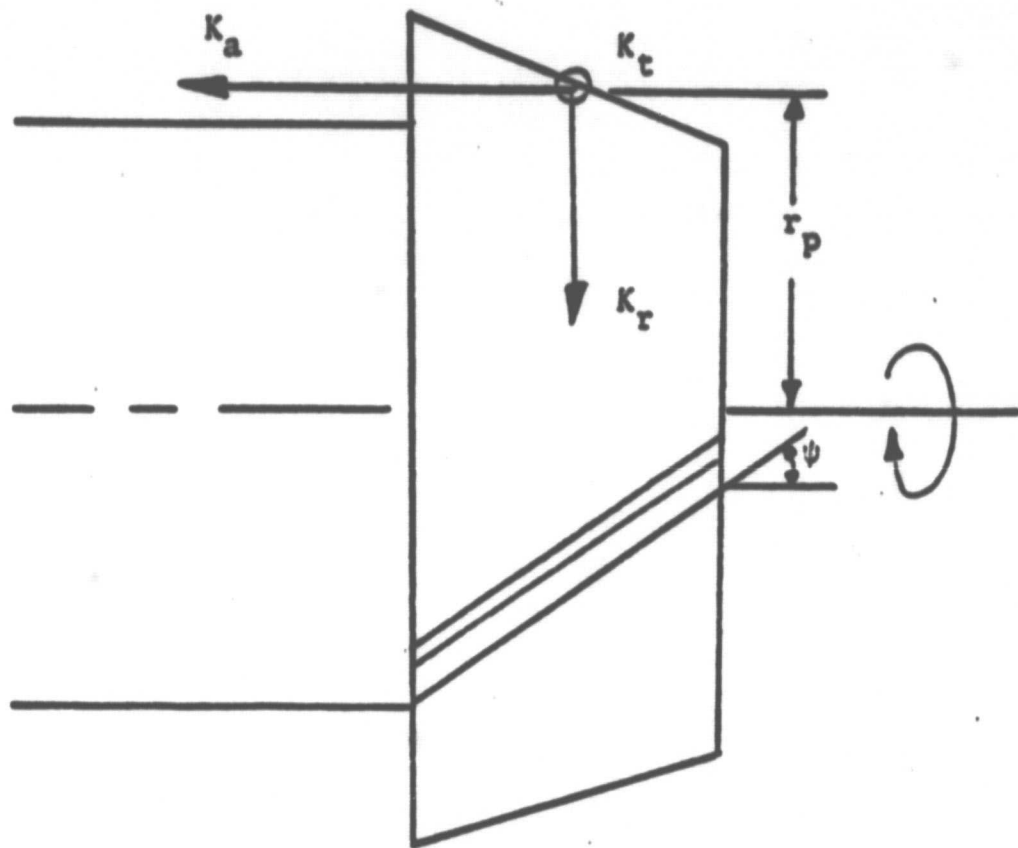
TOOTH FORCES ON SPIRAL BEVEL GEAR
